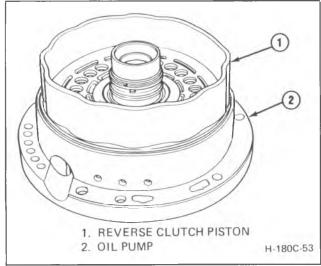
Installing Reverse Clutch Piston Into Oil Pump
